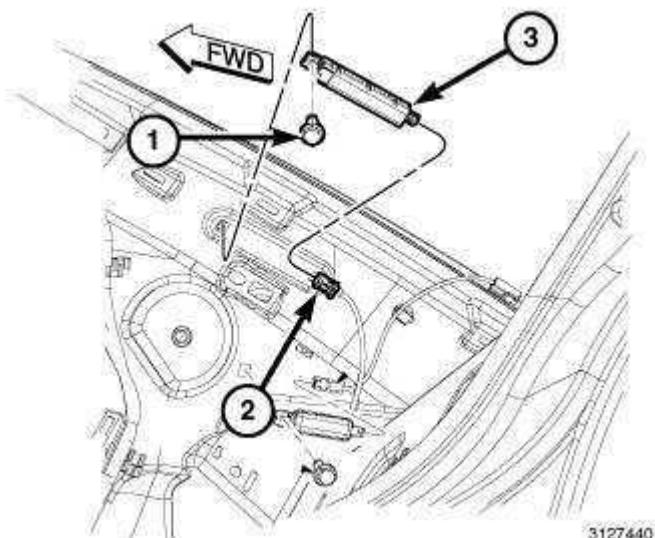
Antenna Cable, Mounting Fasteners And Antenna Module
